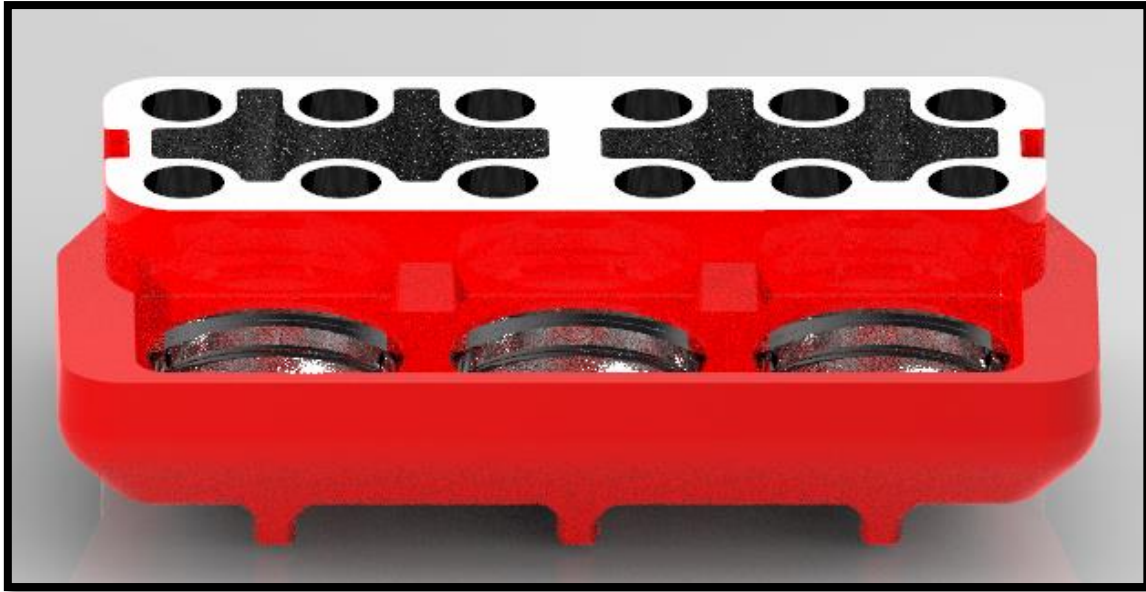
Front Isometric View of CAD Model of BSAB-S-120
